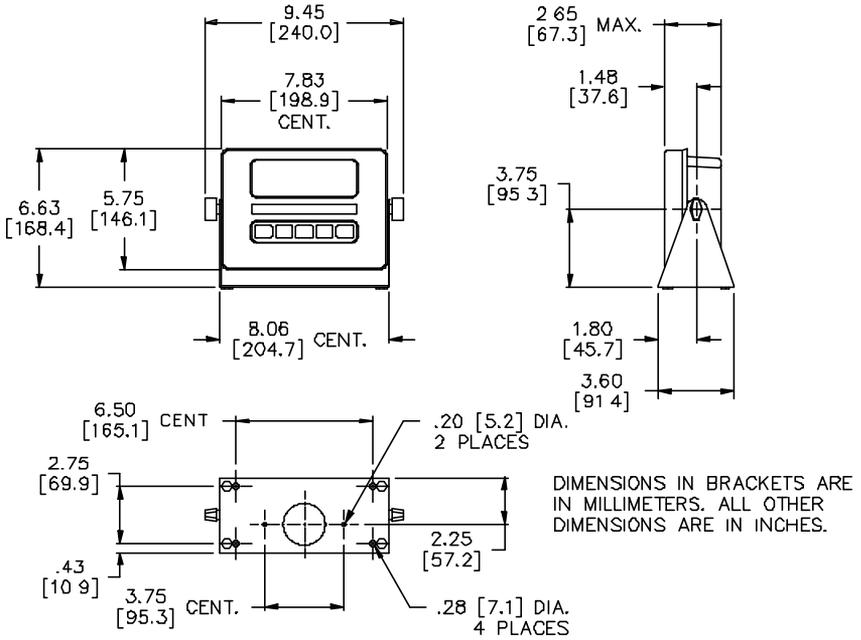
M350 Zinc Die Cast Front Dimensions
